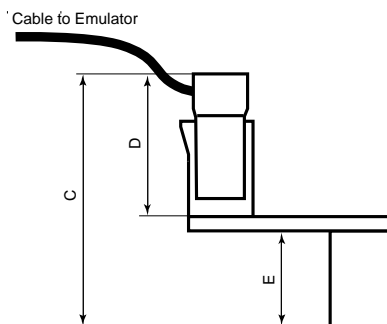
Dimensions of the 20-pin JTAG adapter for ARM. Side view. C = 22.7 mm (0.88 in.) D = 15.0 mm (0.59 in.) E = 11.0 mm (0.43 in.).
